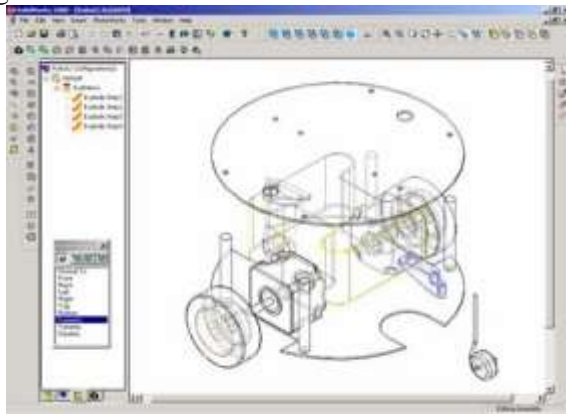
SolidWorks CAD Model of Lawn Mower Mobile Robot
